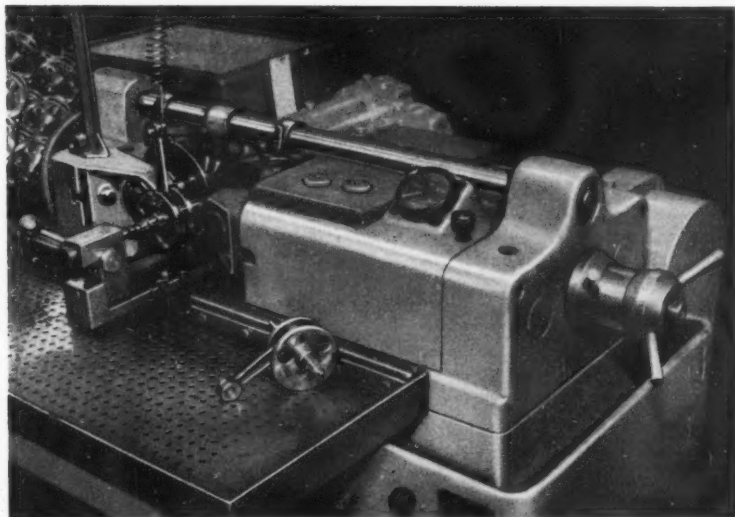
For Super-finishing the Oil Seal Diameters Adjacent to the Counter-weight Faces, an Air-operated Attachment is Employed on an Adapted Innocenti-built Lathe. A Finish of the Order of 2 Micro-inches is Obtained
